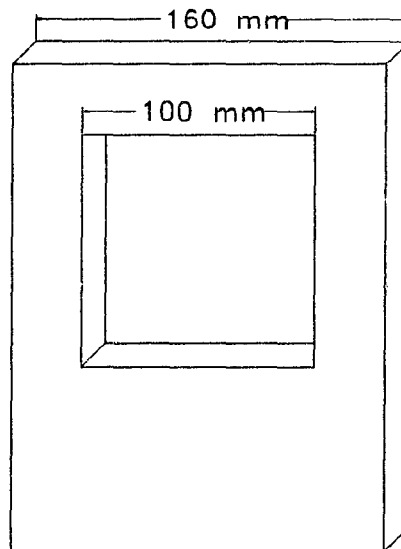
Perspex sample holder. The center hole is 100mm by 100mm. The sample holder is 12mm thick.
